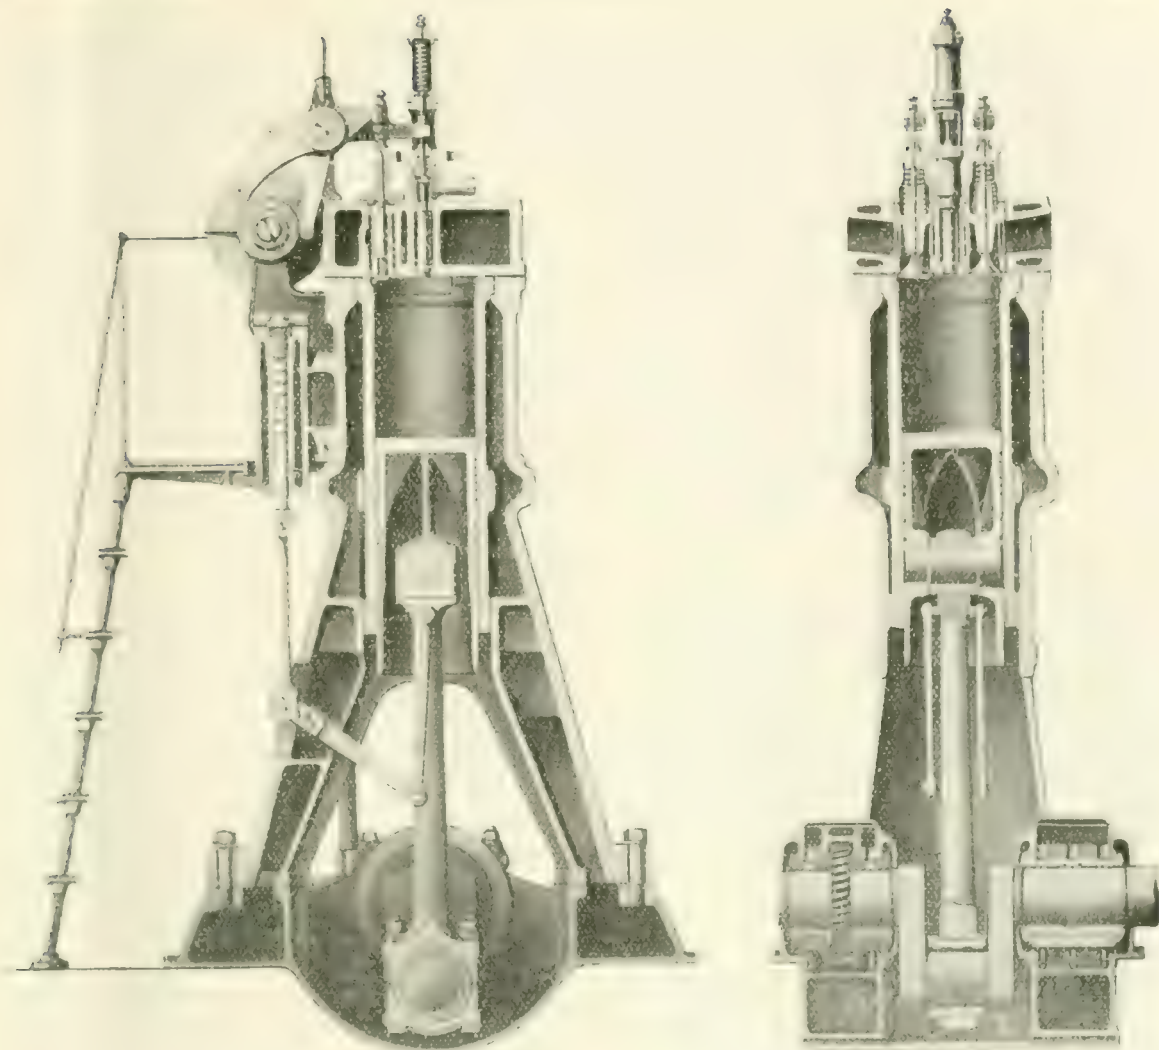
SECTIONAL ARRANGEMENT OF THE DOUBLE ENGINE.
